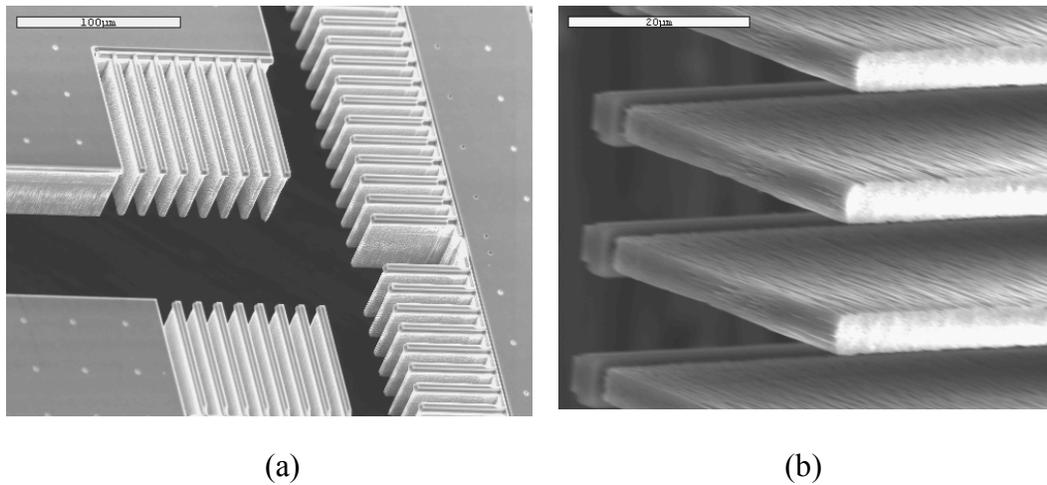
Etching profile of the sensing comb fingers. (a) Stator comb drives after the device is released. (b) Backside closed-up view of the comb fingers.
